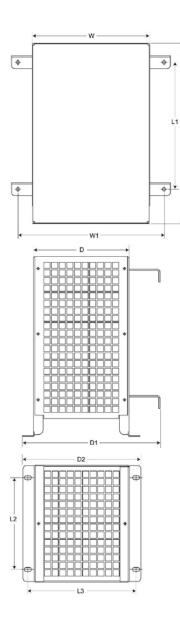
Dimension drawing: Braking resistor, frame sizes FSC, FSD, FSE, FSF
